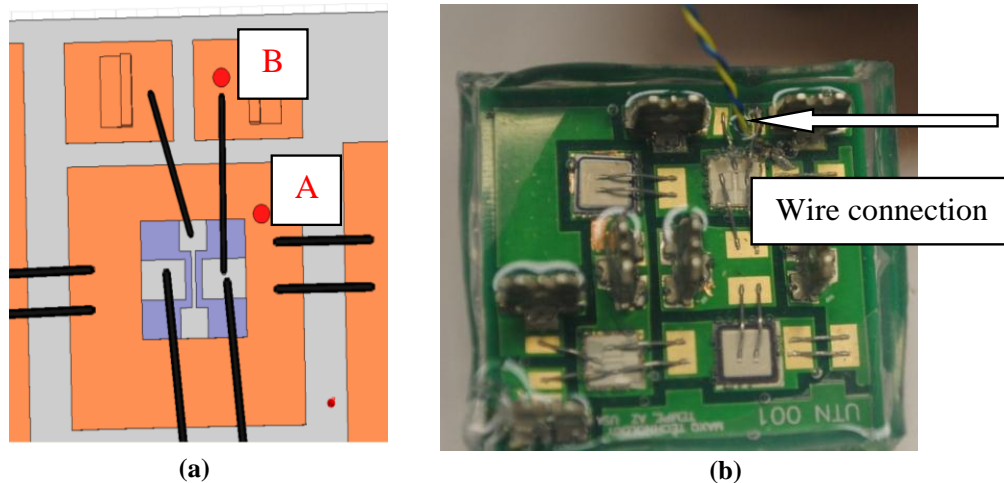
Module with wire connection from IGBT die: (a) wire soldering schematic and (b) photo of finished module.
